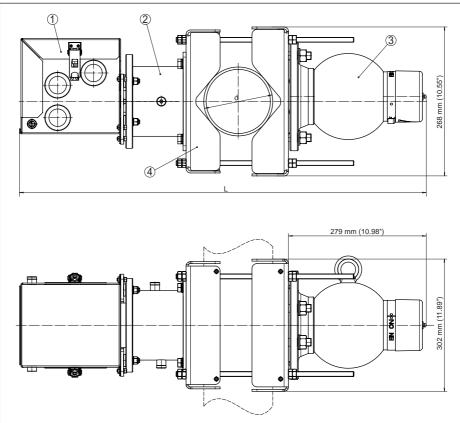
Mounting bracket with horizontally mounted sensor and air cooling
